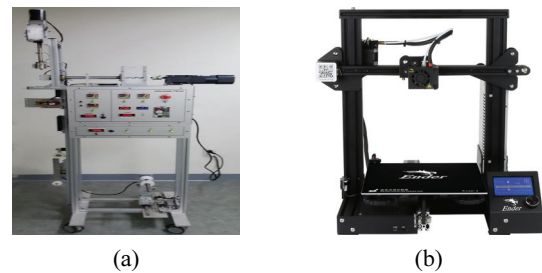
Devices for fabrication of mixed radiation shield. (a) Filament Extruder (b) 3D Printer (Machine Parameters).
